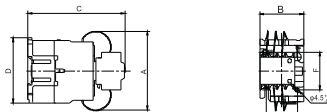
outline dimensions and installation of CJ19-25-43 contactor
